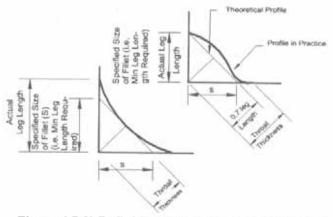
Definition of Throat in a Fillet Weld
